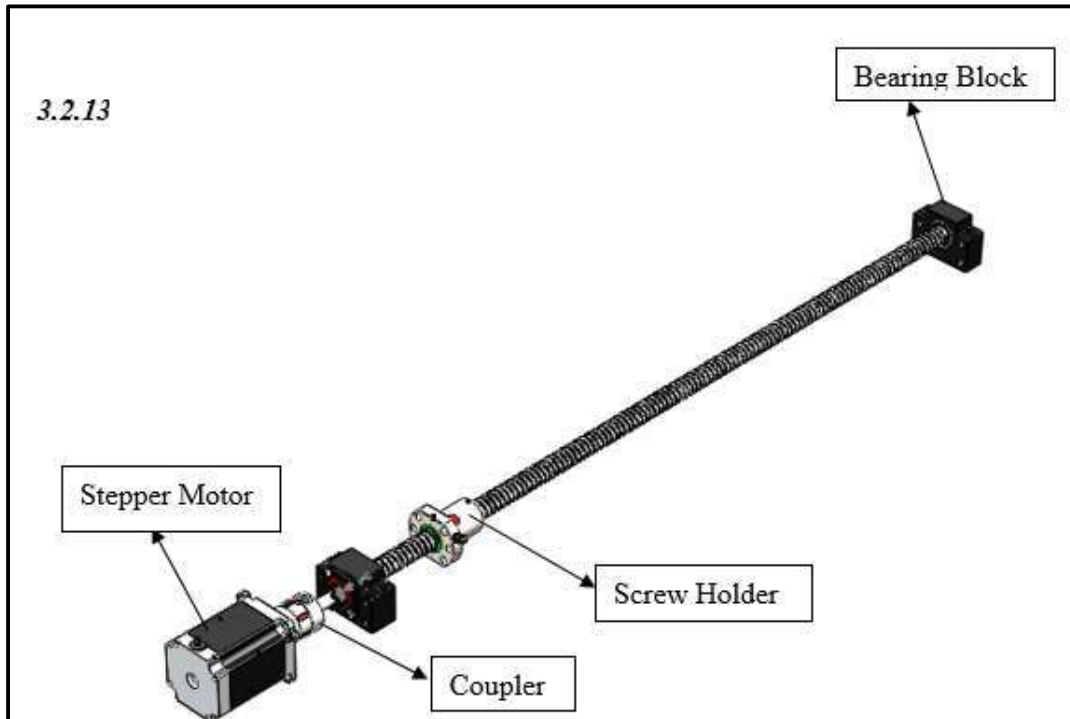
Isometric View of the Sub Assembly of the Ball Screw with Stepper Motor (Nema-17), Bearing Block, and Coupler
